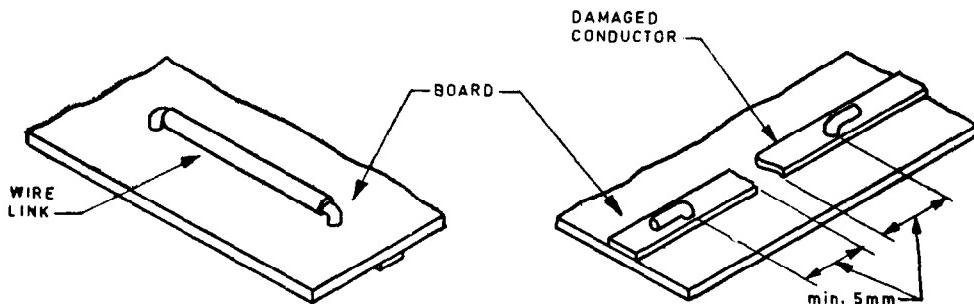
INSULATED WIRE USING DRILLED HOLE CONNECTIONS
